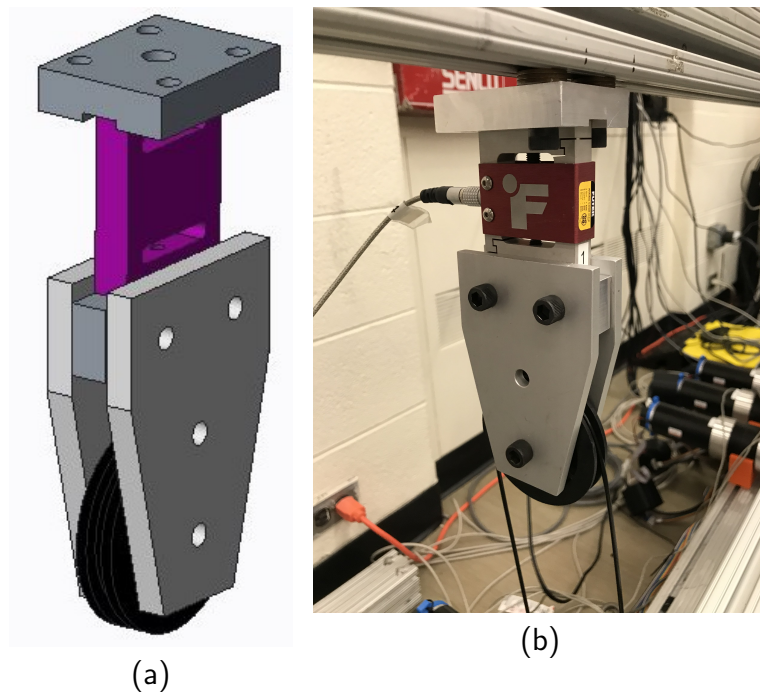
(a) Creo assembly. (b) Assembly realization.
